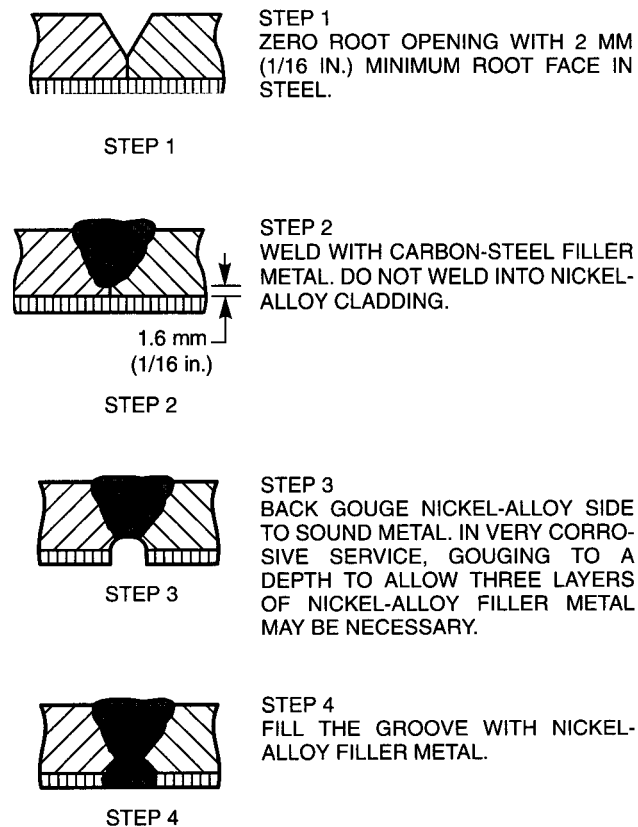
Clad Metal Joint Design and Welding Fabrication Sequence When Both Sides of Joint are Accessible
